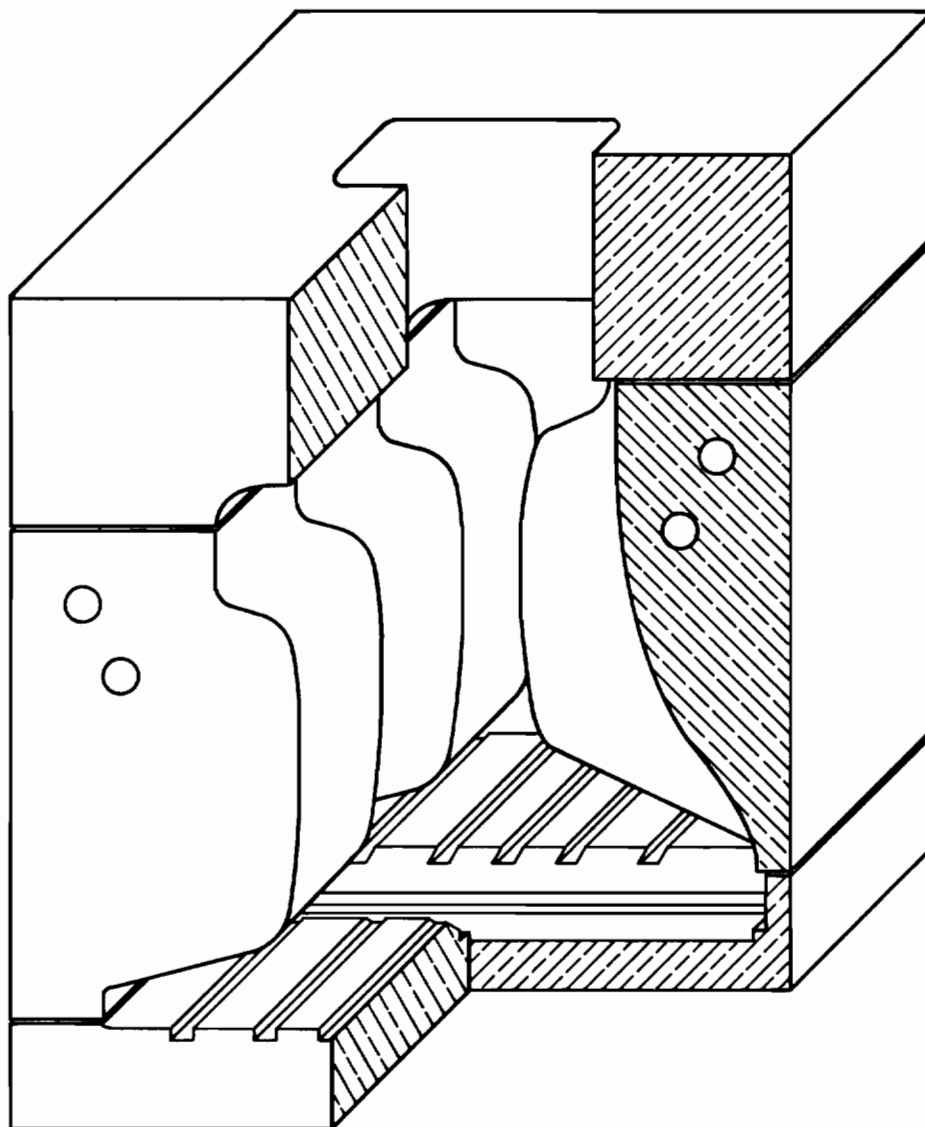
SCHEMATIC OF MOLD COMPONENTS.
